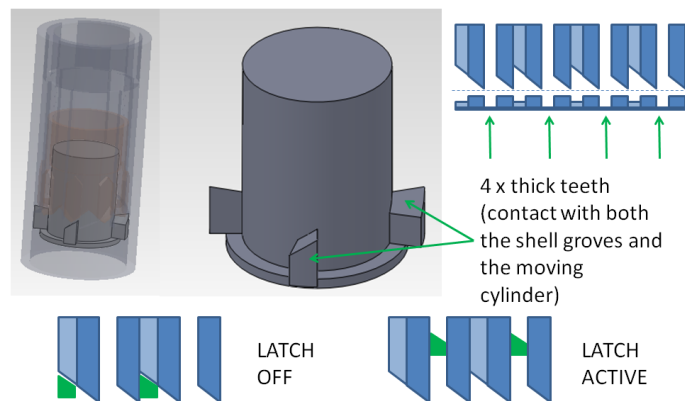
Blocking Component geometry and possible sliding grooves
